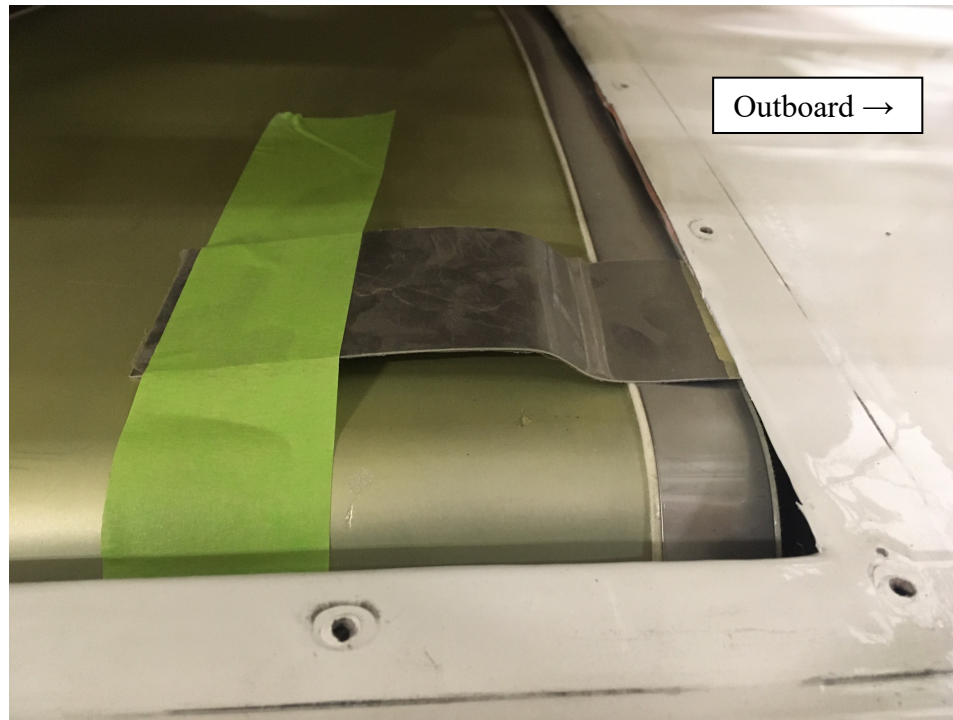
Holding Outboard Fabric Underneath Capstrip While Gluing
